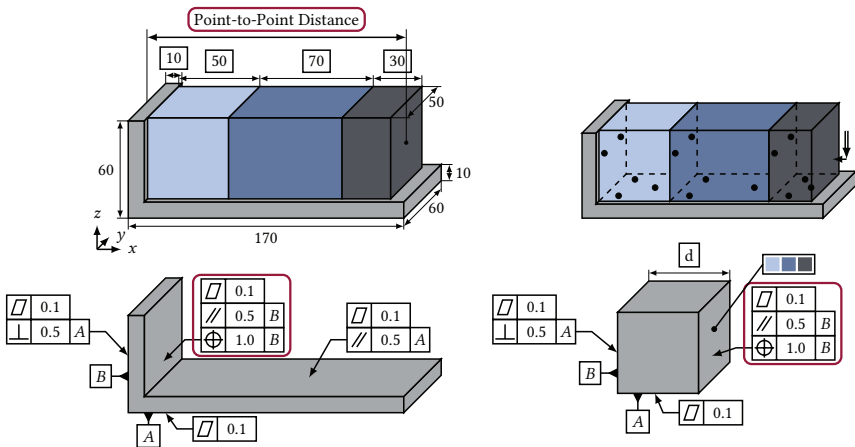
Tolerance Stack-Up of four Parts with revised Tolerancing Scheme
